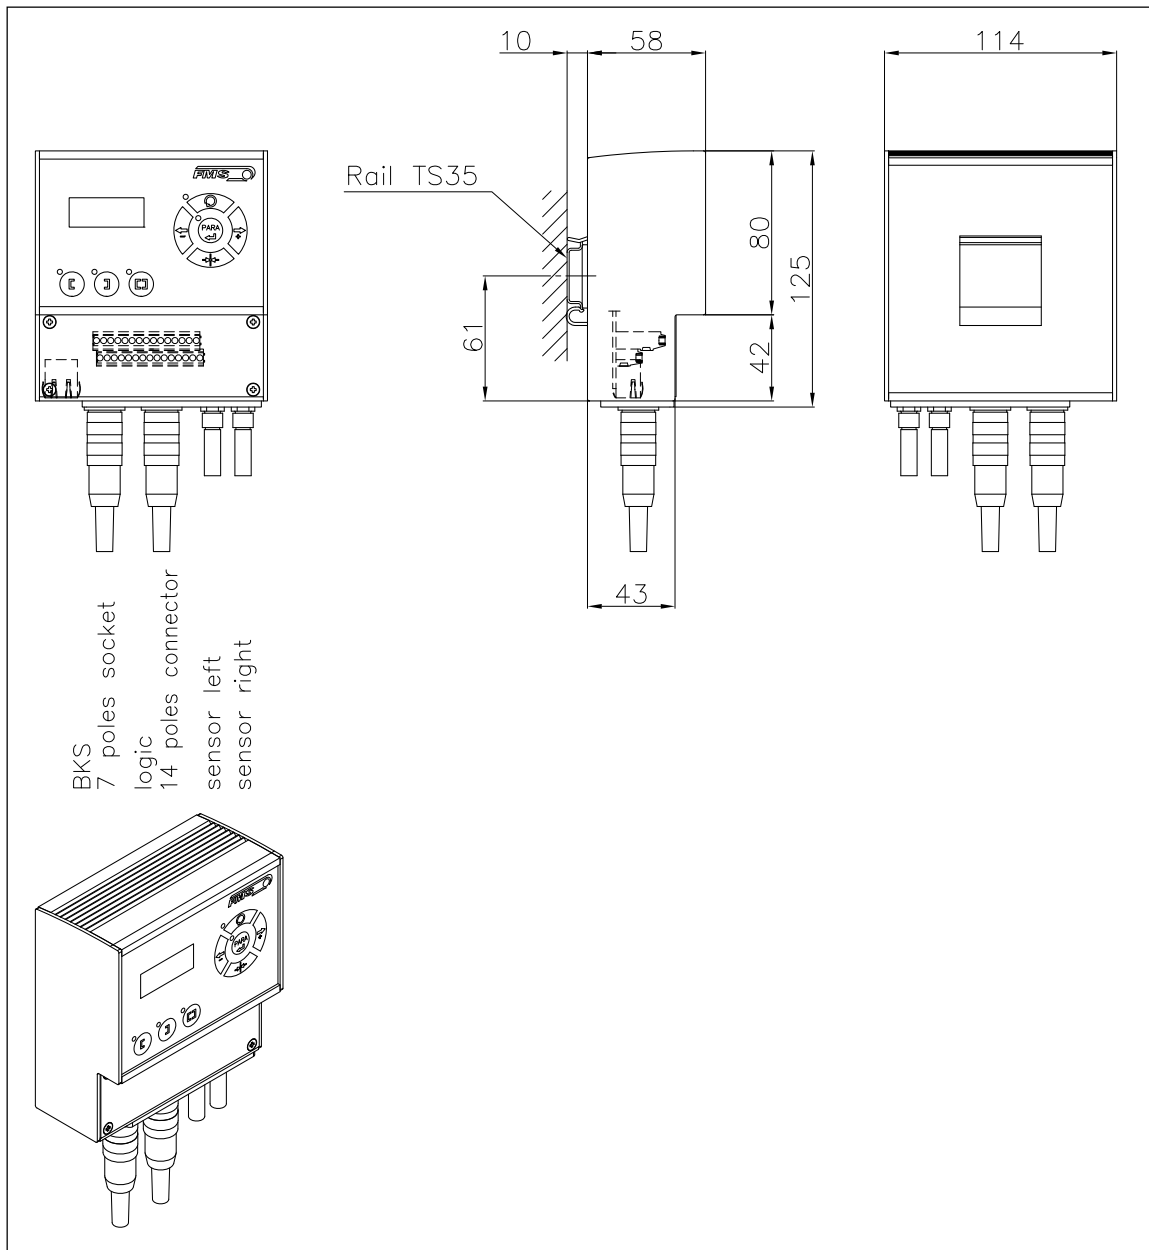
Outline Drawing BKS309.R.C for DIN rail mounting with connectors
